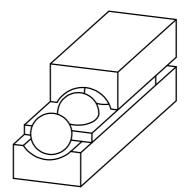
Non-recirculating linear ball bearing, linear guideway, deep groove type
